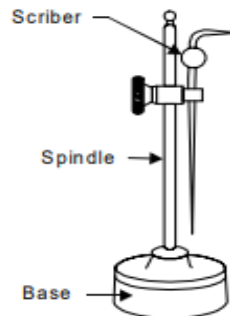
Shows a surface gauge or scribbling block (wordpress.com).
